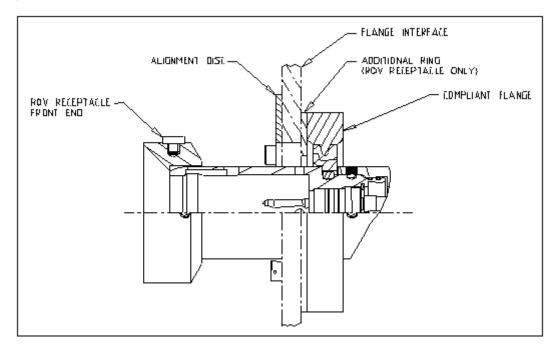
Sectional view to show installation and parts of compliant flange-mount connector
